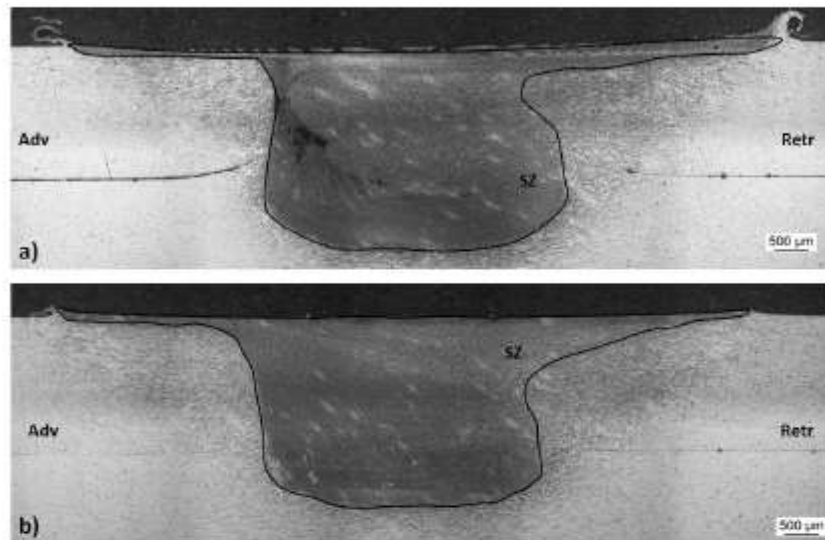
Cross-sections of FSW lap joints produced at 1200 rpm and 152 mm/min (0,13 mm/rev) with a) conventional threaded tool and b) tool with 3 flats
